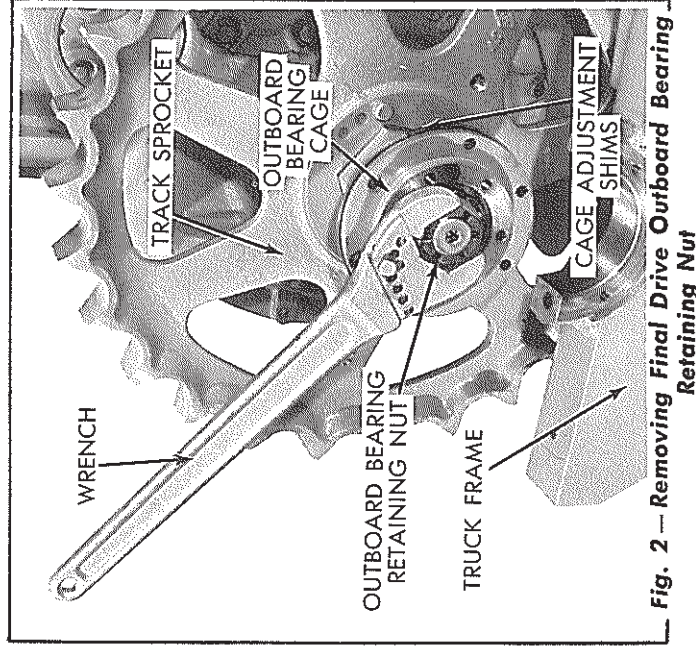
Removing Final Drive Outboard Bearing Retaining Nut
